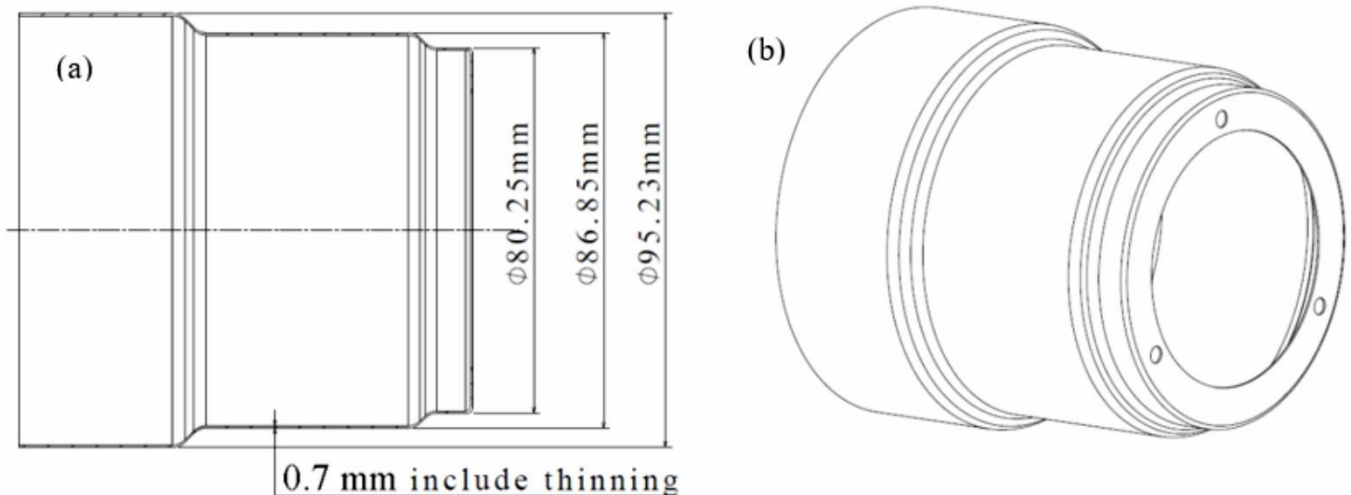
Design of the stepped thin-walled cylindrical workpiece; a) cutting view along the longitudinal axis and b) isometric view
